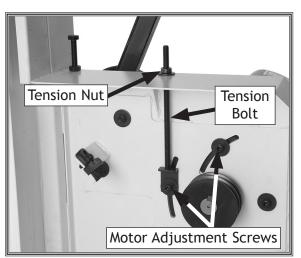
Motor mount bolts and tension bolt. (Lower wheel removed for clarity.)
